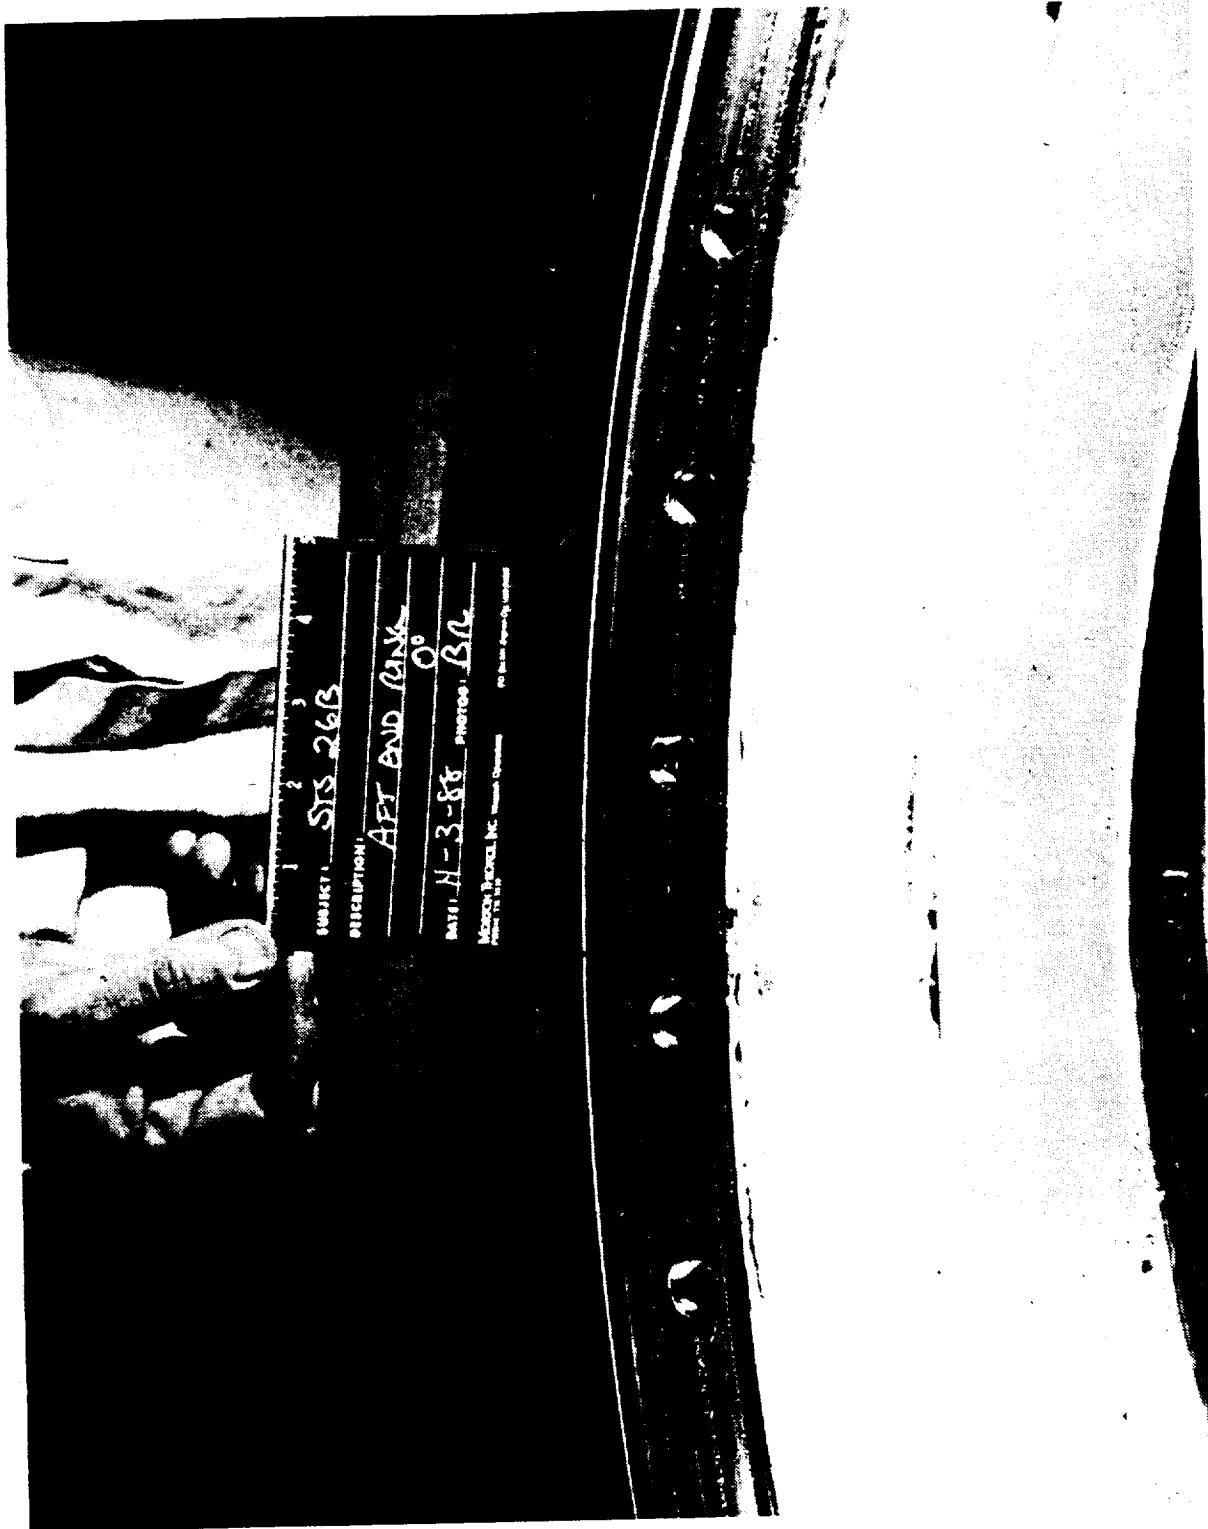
STS-26B Bearing Aft End Ring (0 Degrees)
